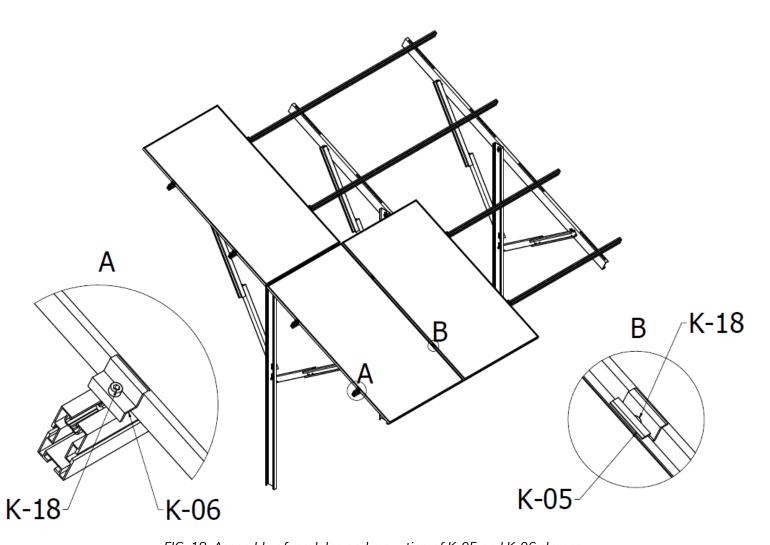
Assembly of modules and mounting of K-05 and K-06 clamps
